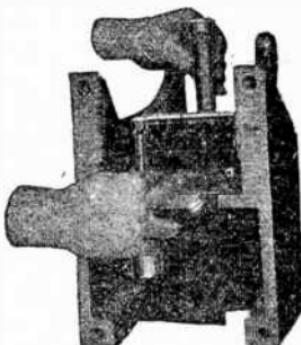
,144.—*How to assemble an air circuit breaker 10. Assembling closing and tripping pins.
